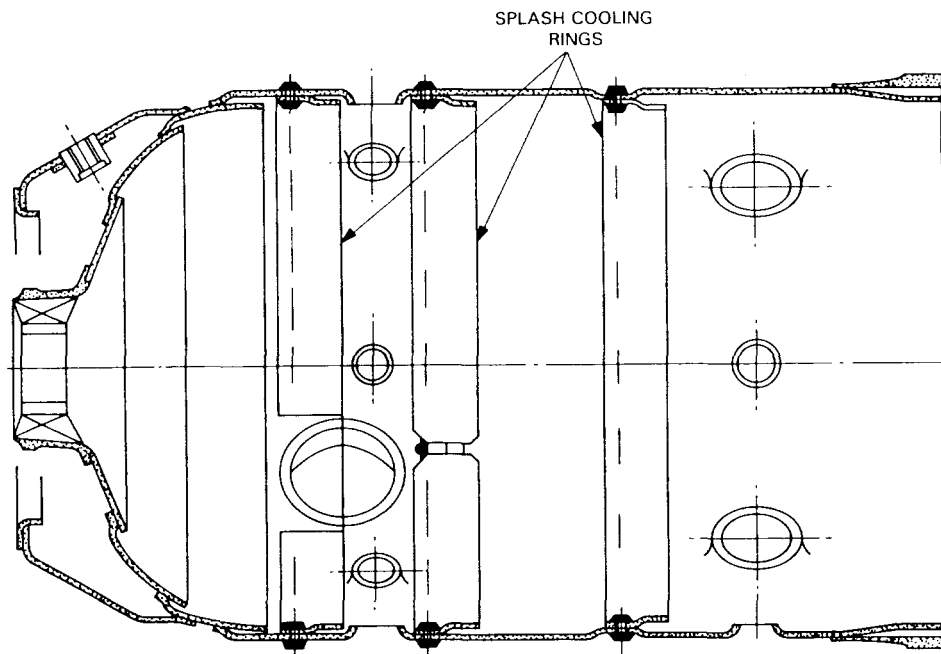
PHASE I COMBUSTION CHAMBER: CROSS-SECTION AND INSIDE VIEW
